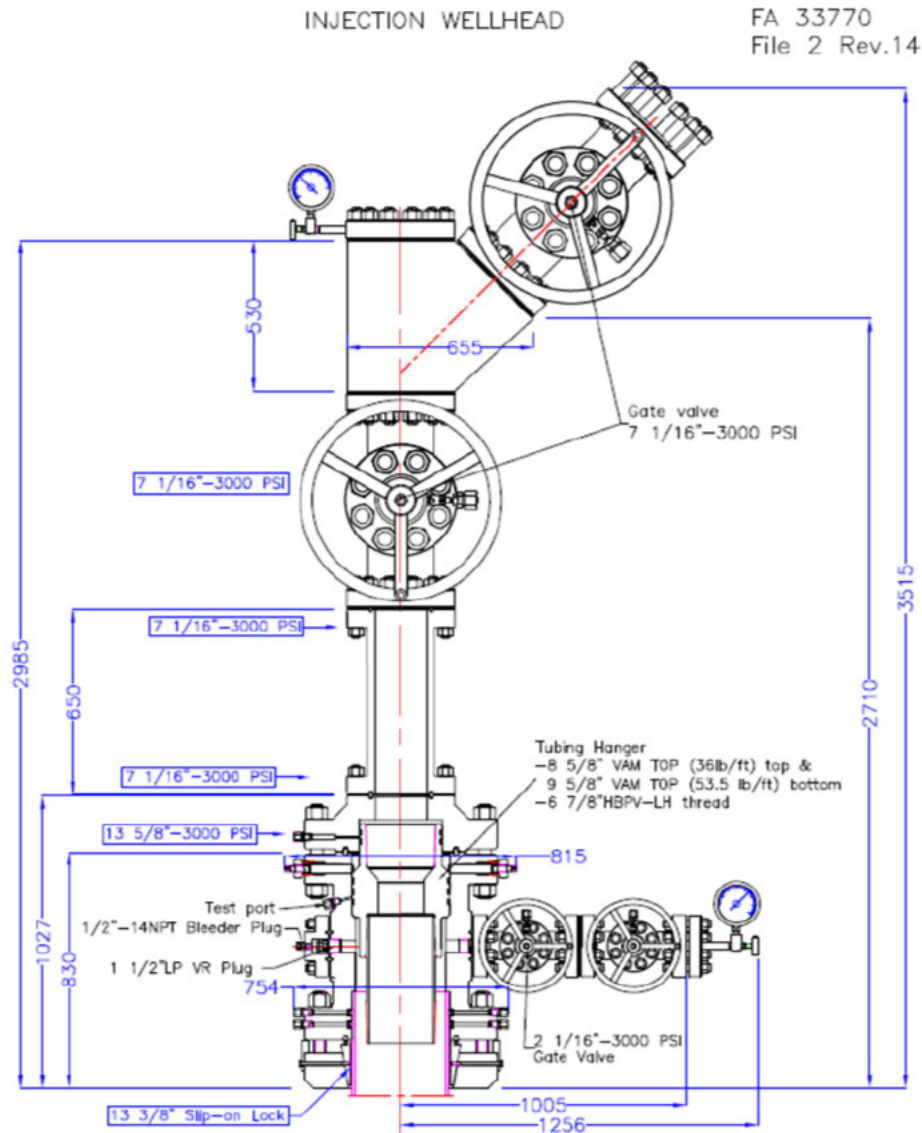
PNA-GT-06-S3 well head and Christmas tree drawing
